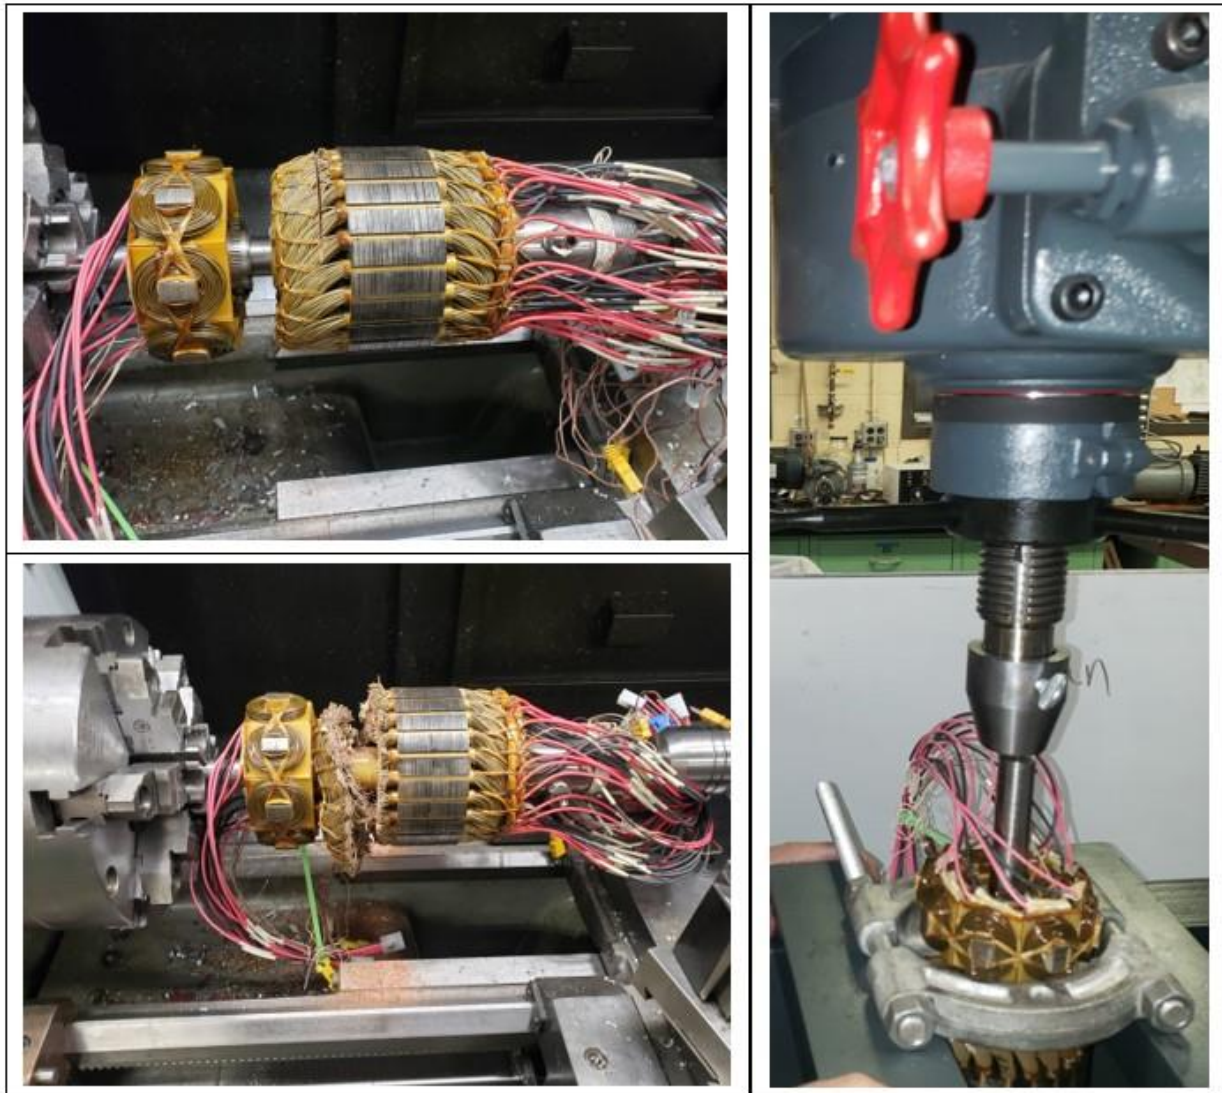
Coil Top Removal for Pulling Collar Clearance
